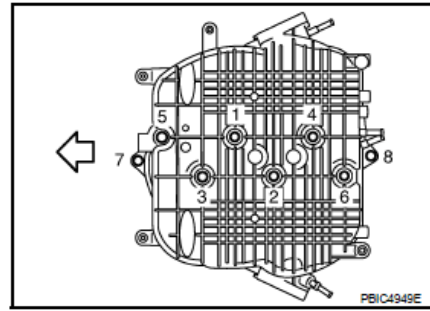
Identifying Intake Manifold Collector Mounting Bolts Tightening Sequence
